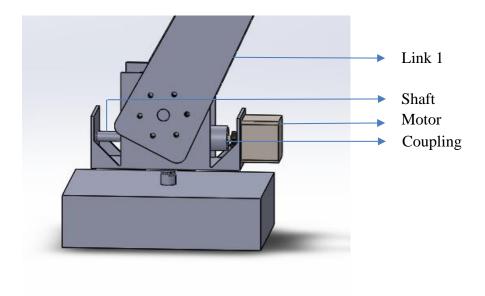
CAD model of prototype 1 (Sleeve bearing)
